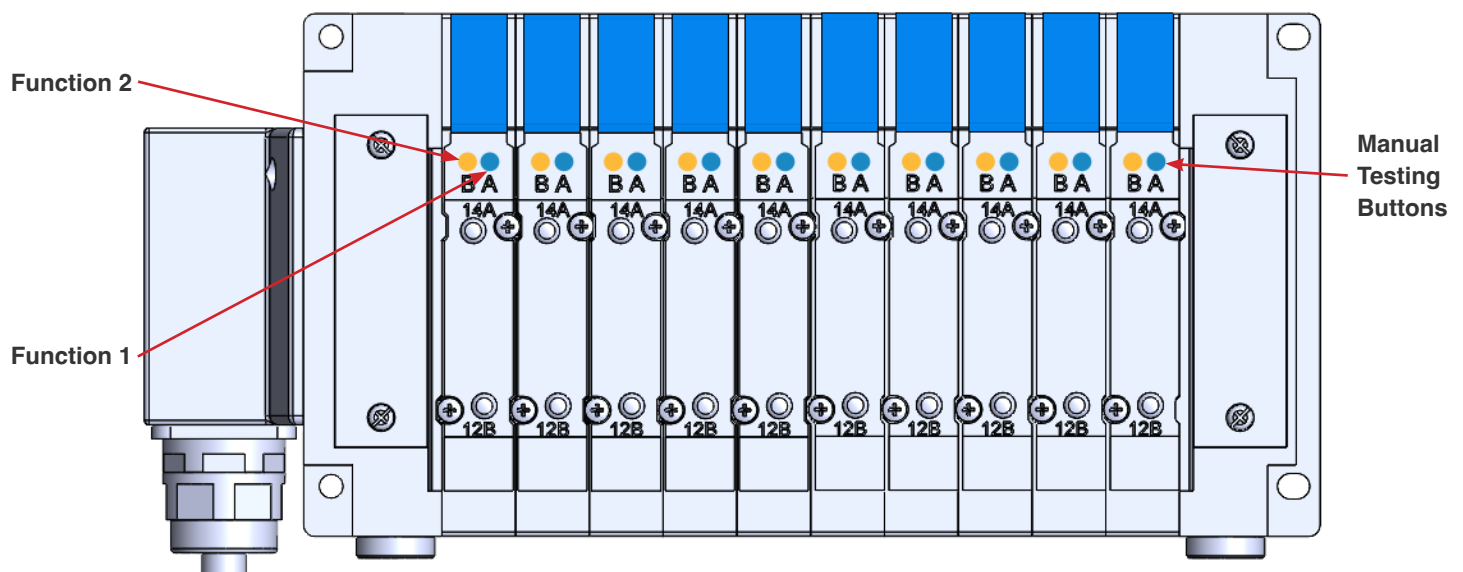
1 - Air Control Manifold solenoid testing buttons
